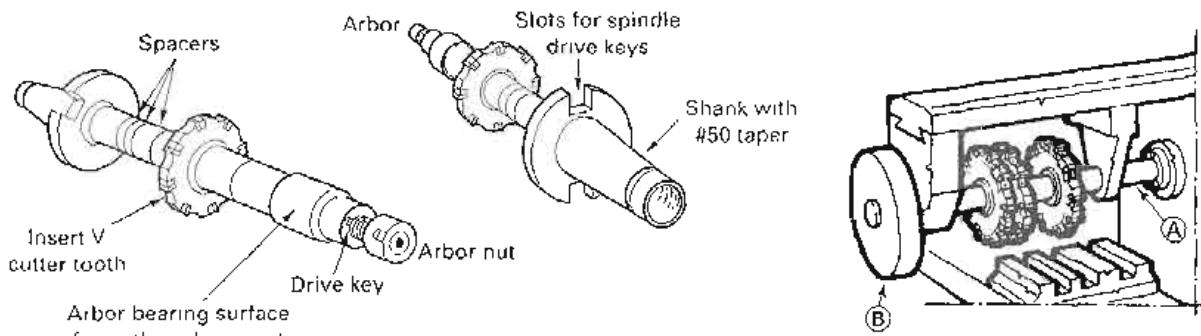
Arbor (two views) used on a horizontal-spindle milling machine on left. On right, a gang-milling setup showing three side-milling cutters mounted on an arbor (A) with an outboard flywheel (B)
